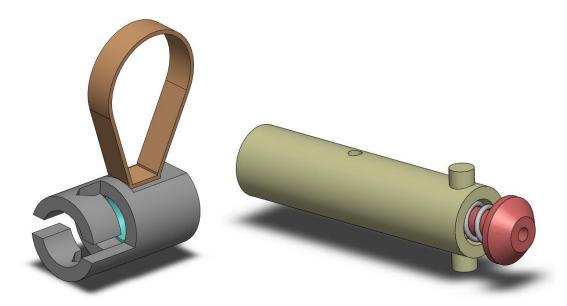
Left: Electrode carrier with bayonet tracks. Right: Driving shaft with pins for the bayonet locking.
